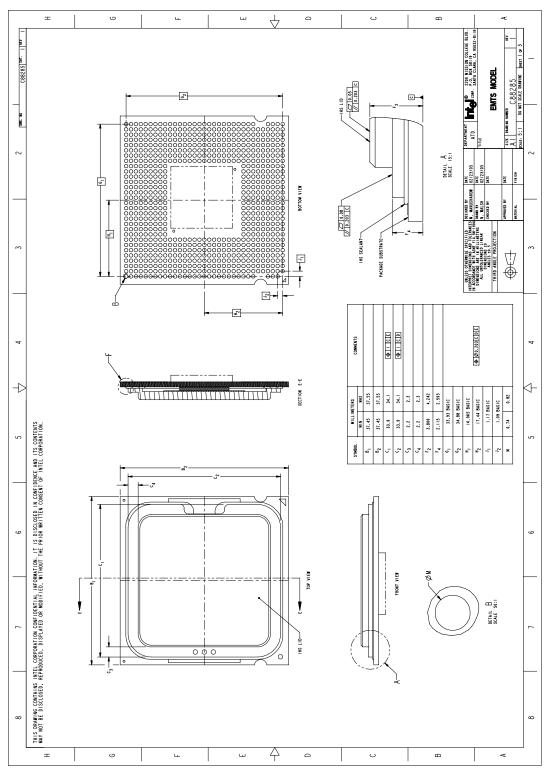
Processor Package Drawing Sheet 2 of 3
